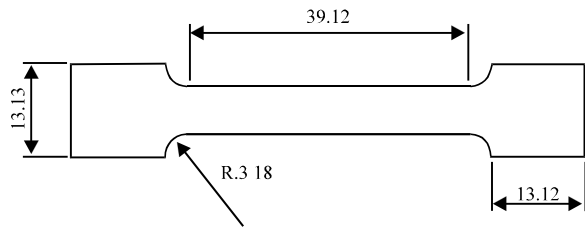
Dimension (mm) of Tensile bar cavity with thickness of 3.17 mm
